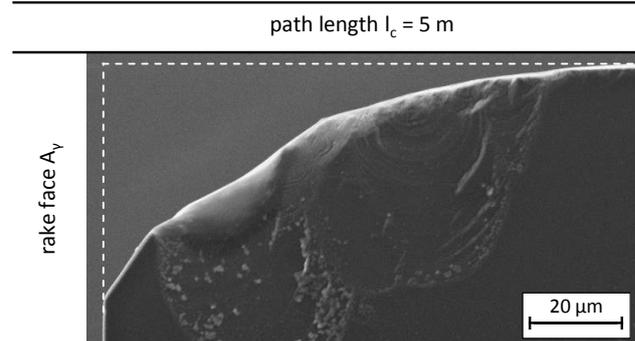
Rake face A_r of a single crystal diamond milling tool after a path length $l_c = 5 \text{ m}$
